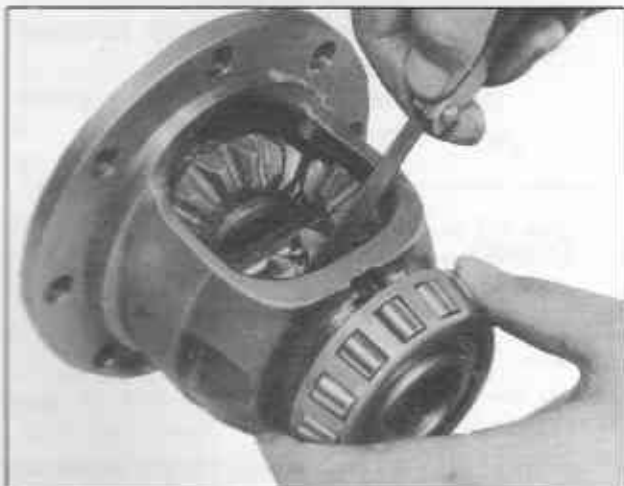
Measuring the clearance between the side gear and thrust washer
